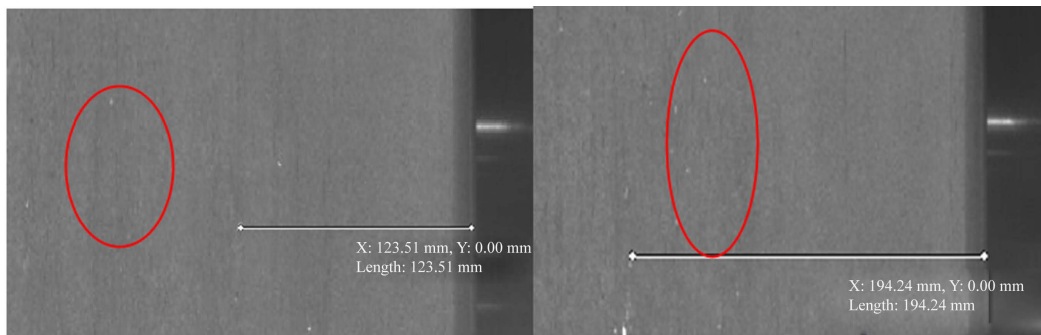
Macro morphology of surface cracks in hot rolled steel plate
